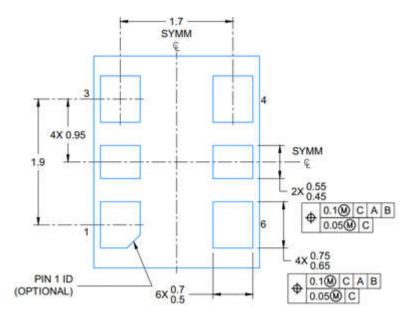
LMK6D/P/H Oscillator in 6-Pin, 3.2mm × 2.5mm DLE Package
